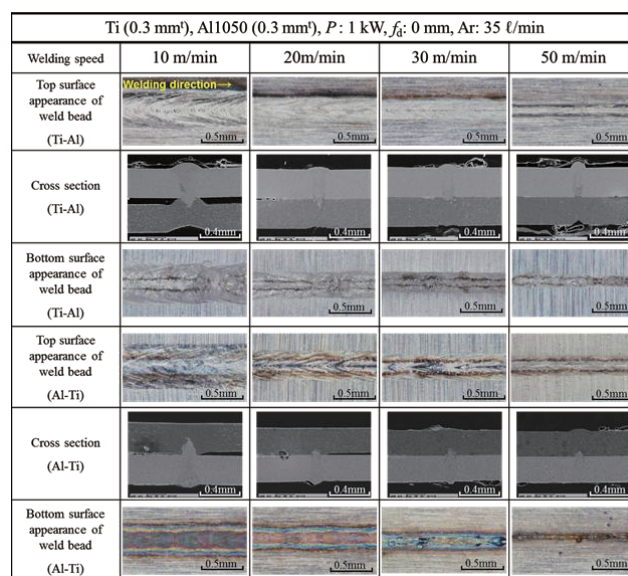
Photographs of top and bottom surface appearances and cross-sectional SEM photos of Ti and Al dissimilar welds made with single-mode fiber laser at different welding speeds.
